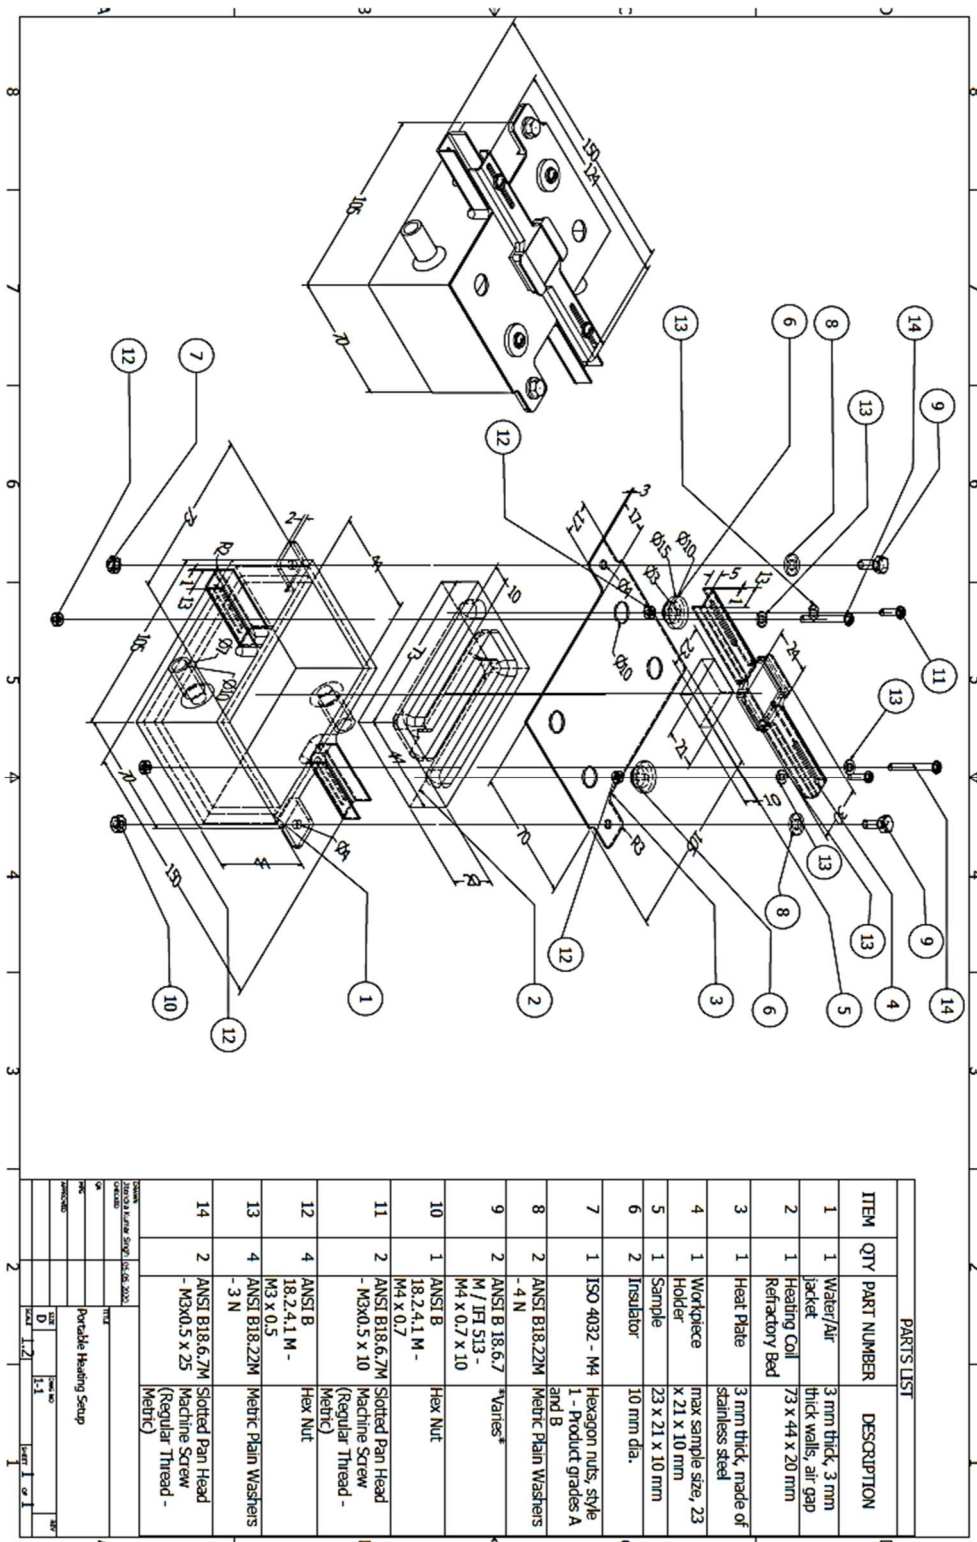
Assembly drawing of Portable Heating Setup (all dimensions are in mm)
